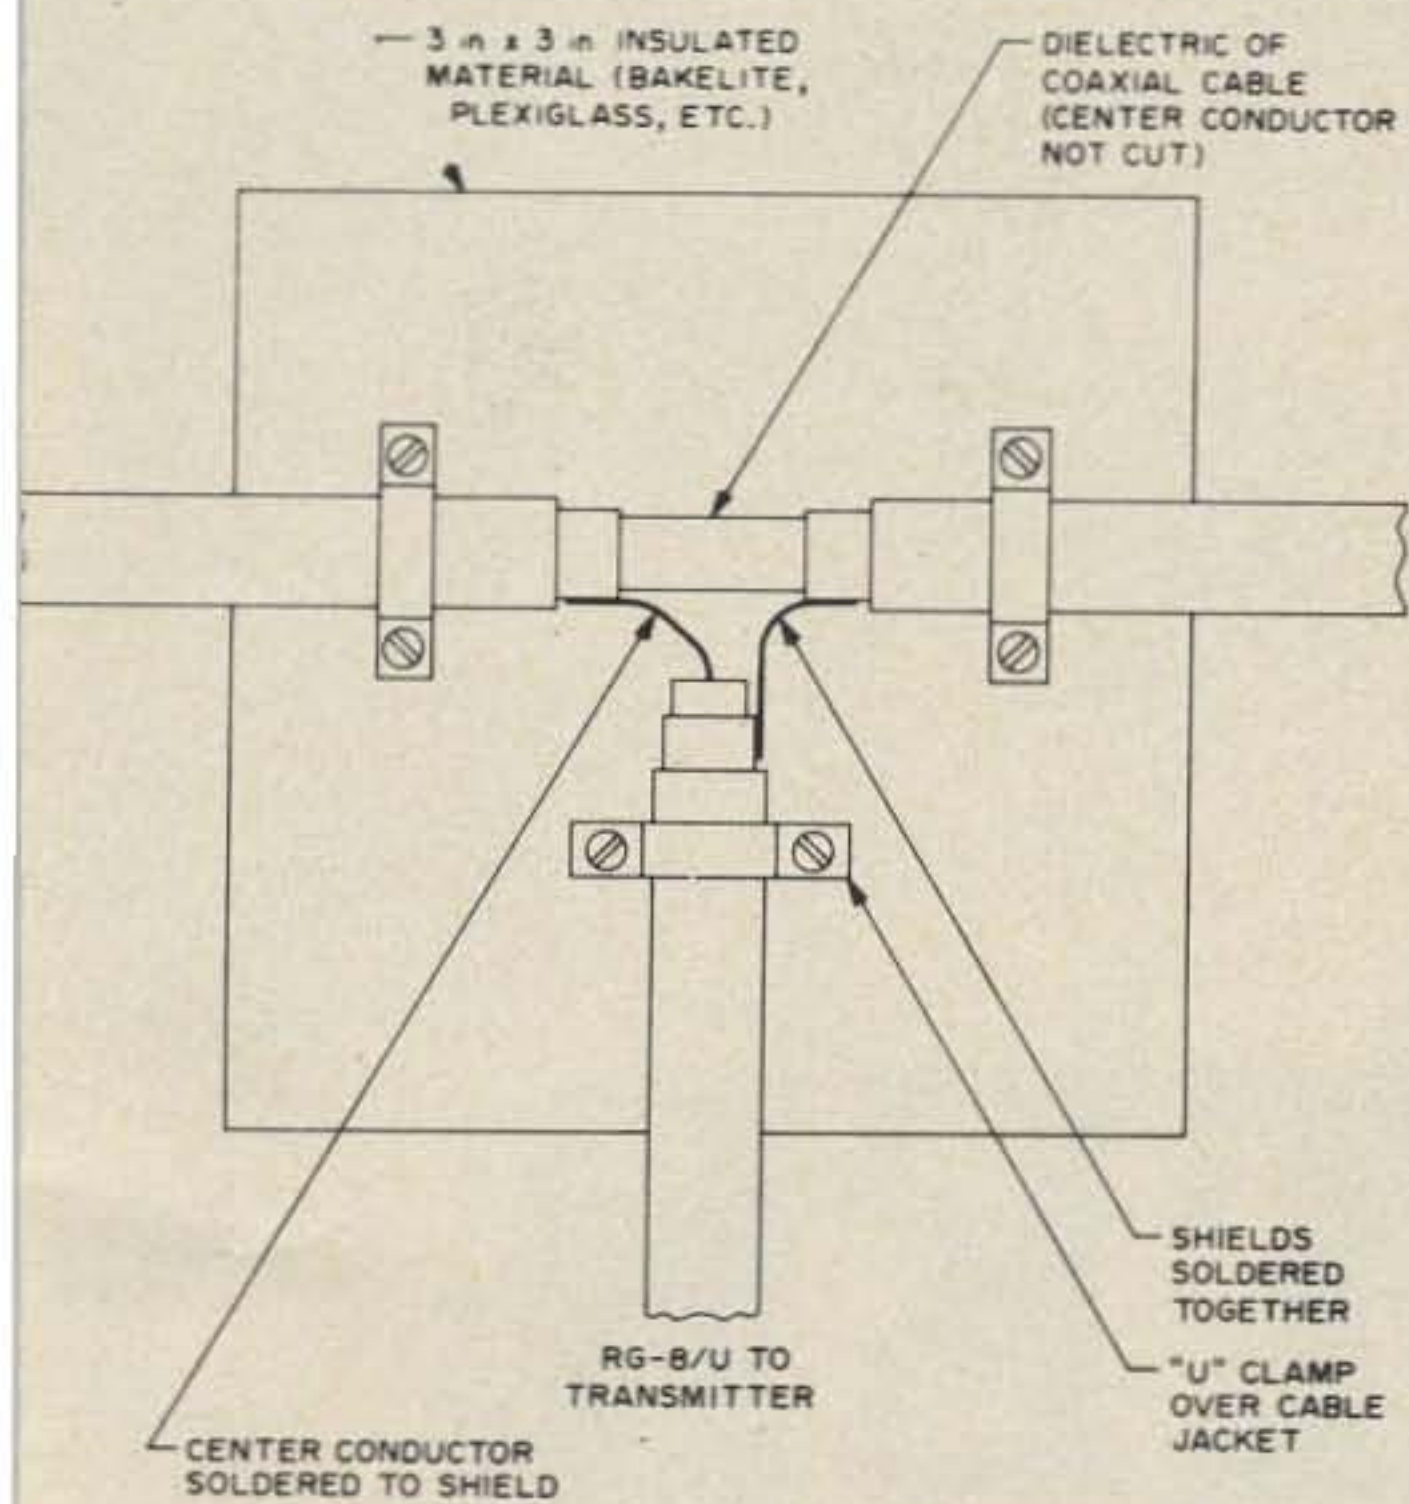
Simple home-brew center connector for antenna easily interconnects coaxial lines. Finished assembly should be weather protected with varnish.
